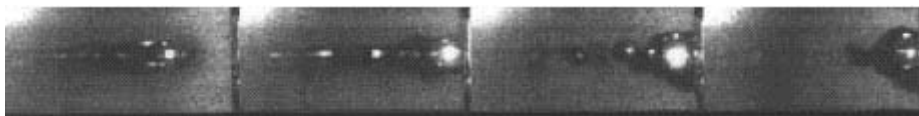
The piezoelectric crystal exerts a pulsing mechanical force to break up the solder jet stream to form solder droplets
